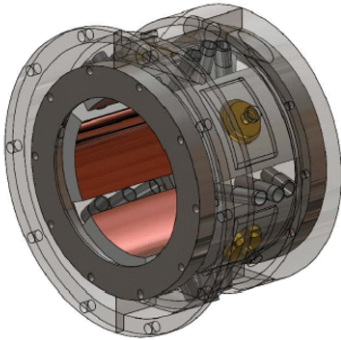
View of the turbine part, details of the blades assembly, Turbomachinery Design Project, Texas A&M.
